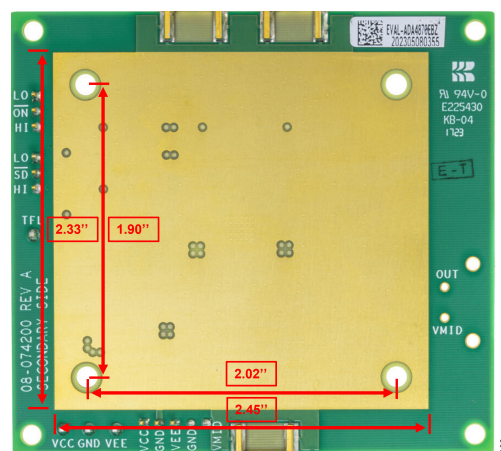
Dimensions of the Heat Sink and Mounting Holes
